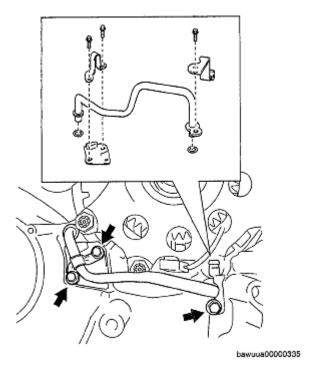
Identifying Tube Wiring Clamp Courtesy of MAZDA MOTORS CORP.
